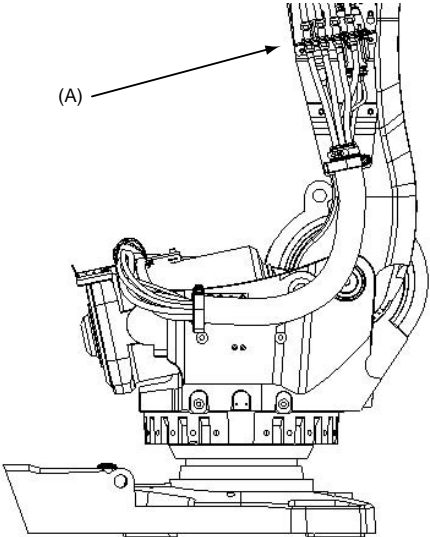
“Orange line” DressPack Lower arm left side view SpotWelding (option 778-2 and option 798-2).
